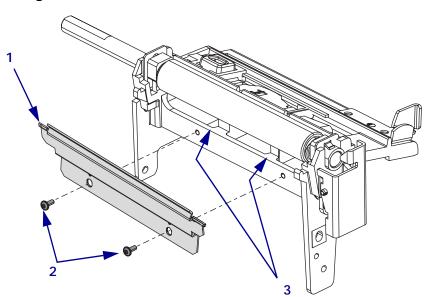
• Remove and Install the Peel-Off/Tear-Off Bar
